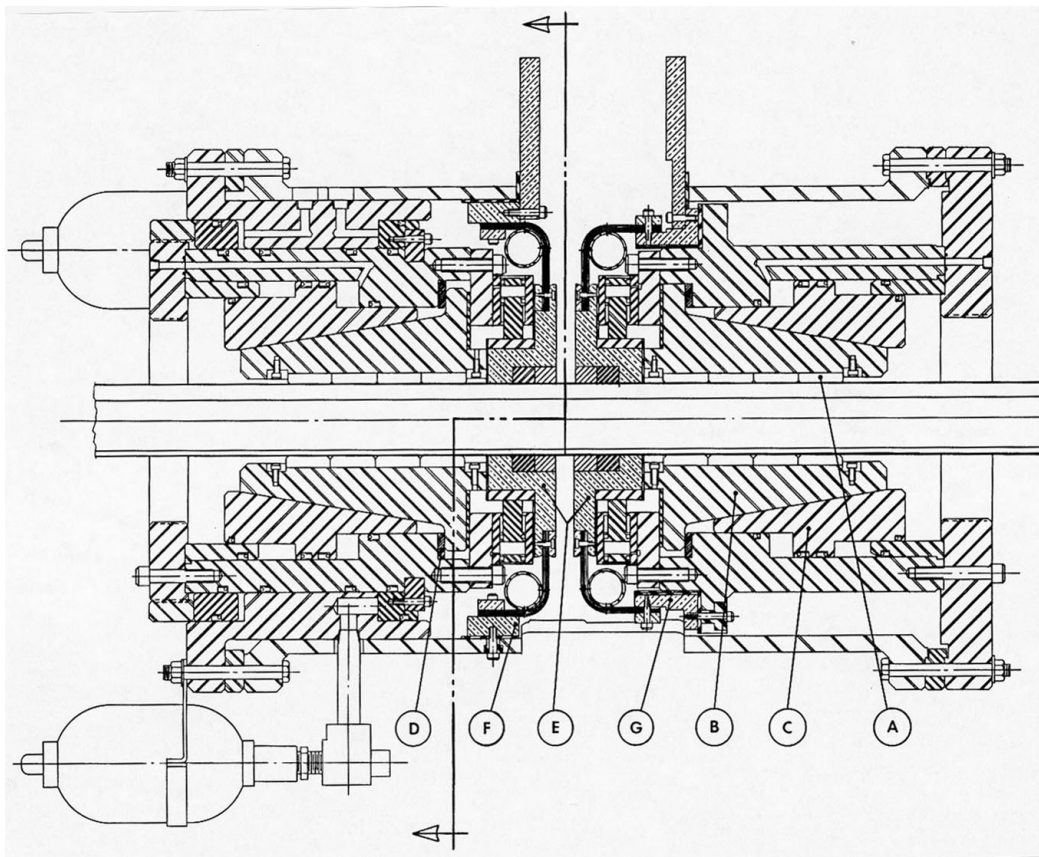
Longitudinal cross-section of OIME, Inc., rail welding fixture
